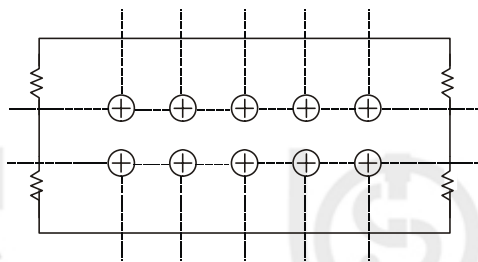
Types of Riveted Joints and Rivetting Arrangements
